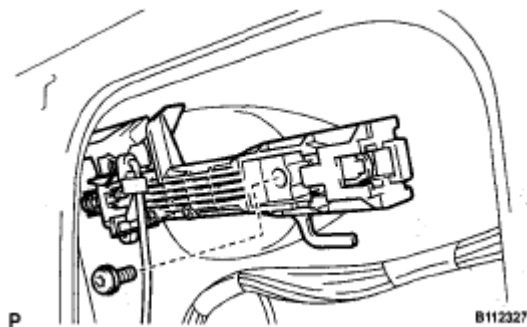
Identifying Front Door Outside Handle Frame Sub-Assembly Screw
